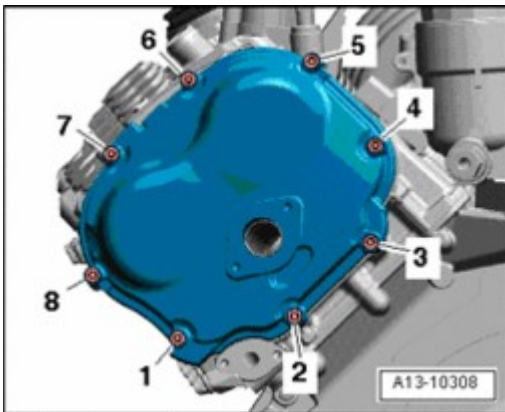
Identifying Left Timing Chain Cover And Tighten/Removing Bolts Sequence
